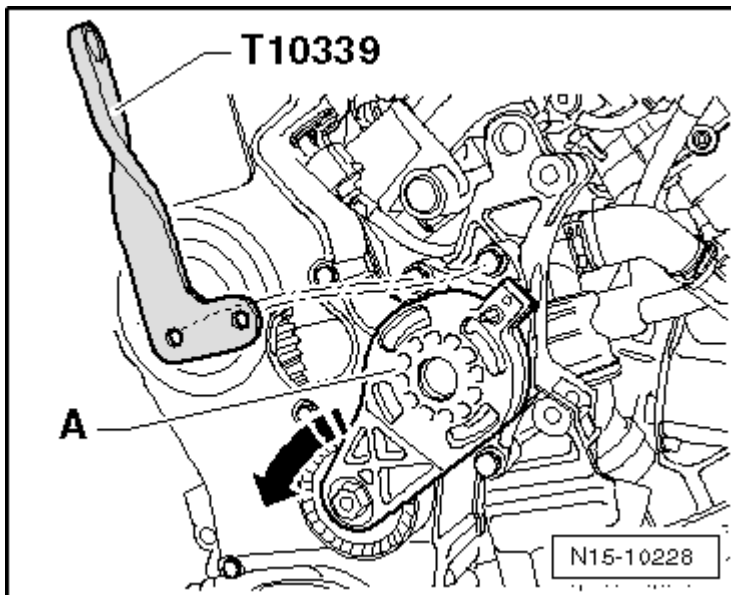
Identifying Ribbed Belt Tensioner And Engine Support Bracket T10339
